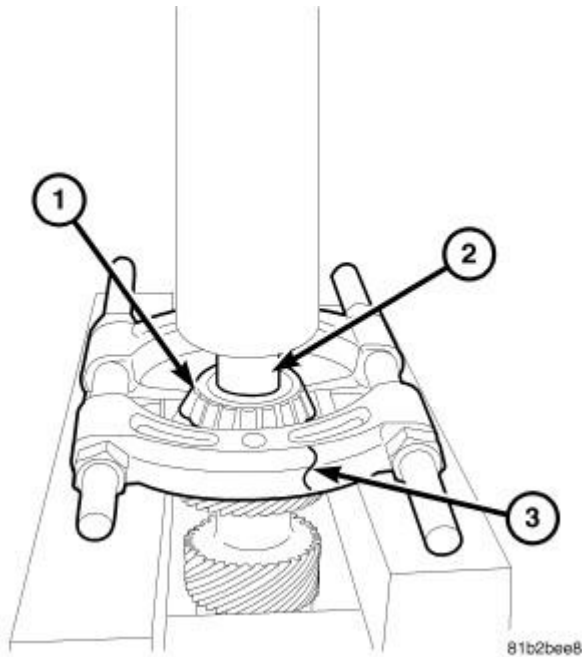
COUNTERSHAFT ADAPTER BEARING
